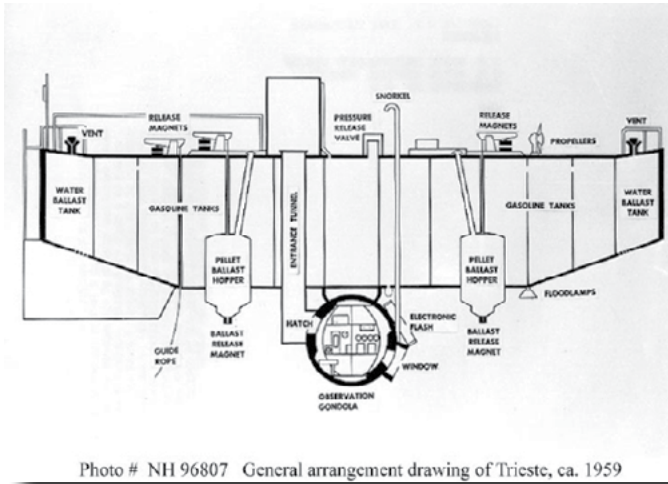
General arrangement drawing of Trieste, ca. 1959
